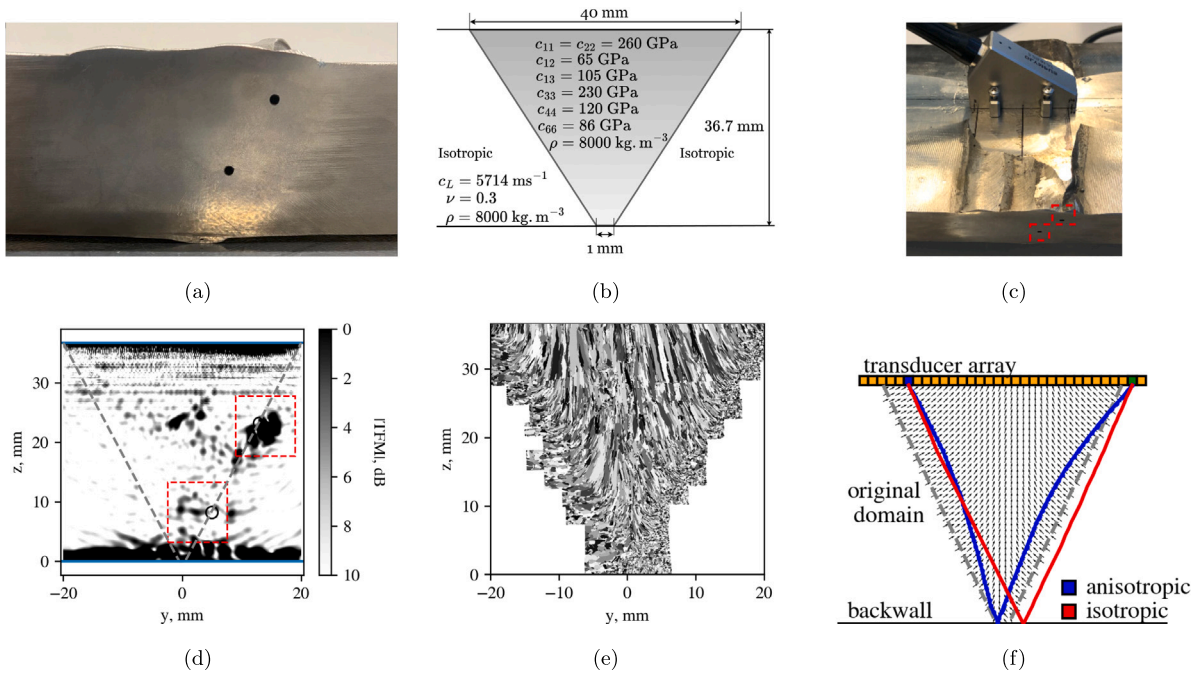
Weld mock-up: (a) weld cross-section with artificial defects drilled through the right chamfer; (b) weld dimensions and material properties; (c) 64-element array transducer positioned centrally over the weld; (d) total focusing method imaging with isotropic assumption; (e) EBSD imaging of the weld; (f) ultrasonic beam paths assuming isotropy (red) and anisotropy (blue). (For interpretation of the references to colour in this figure legend, the reader is referred to the web version of this article.)
